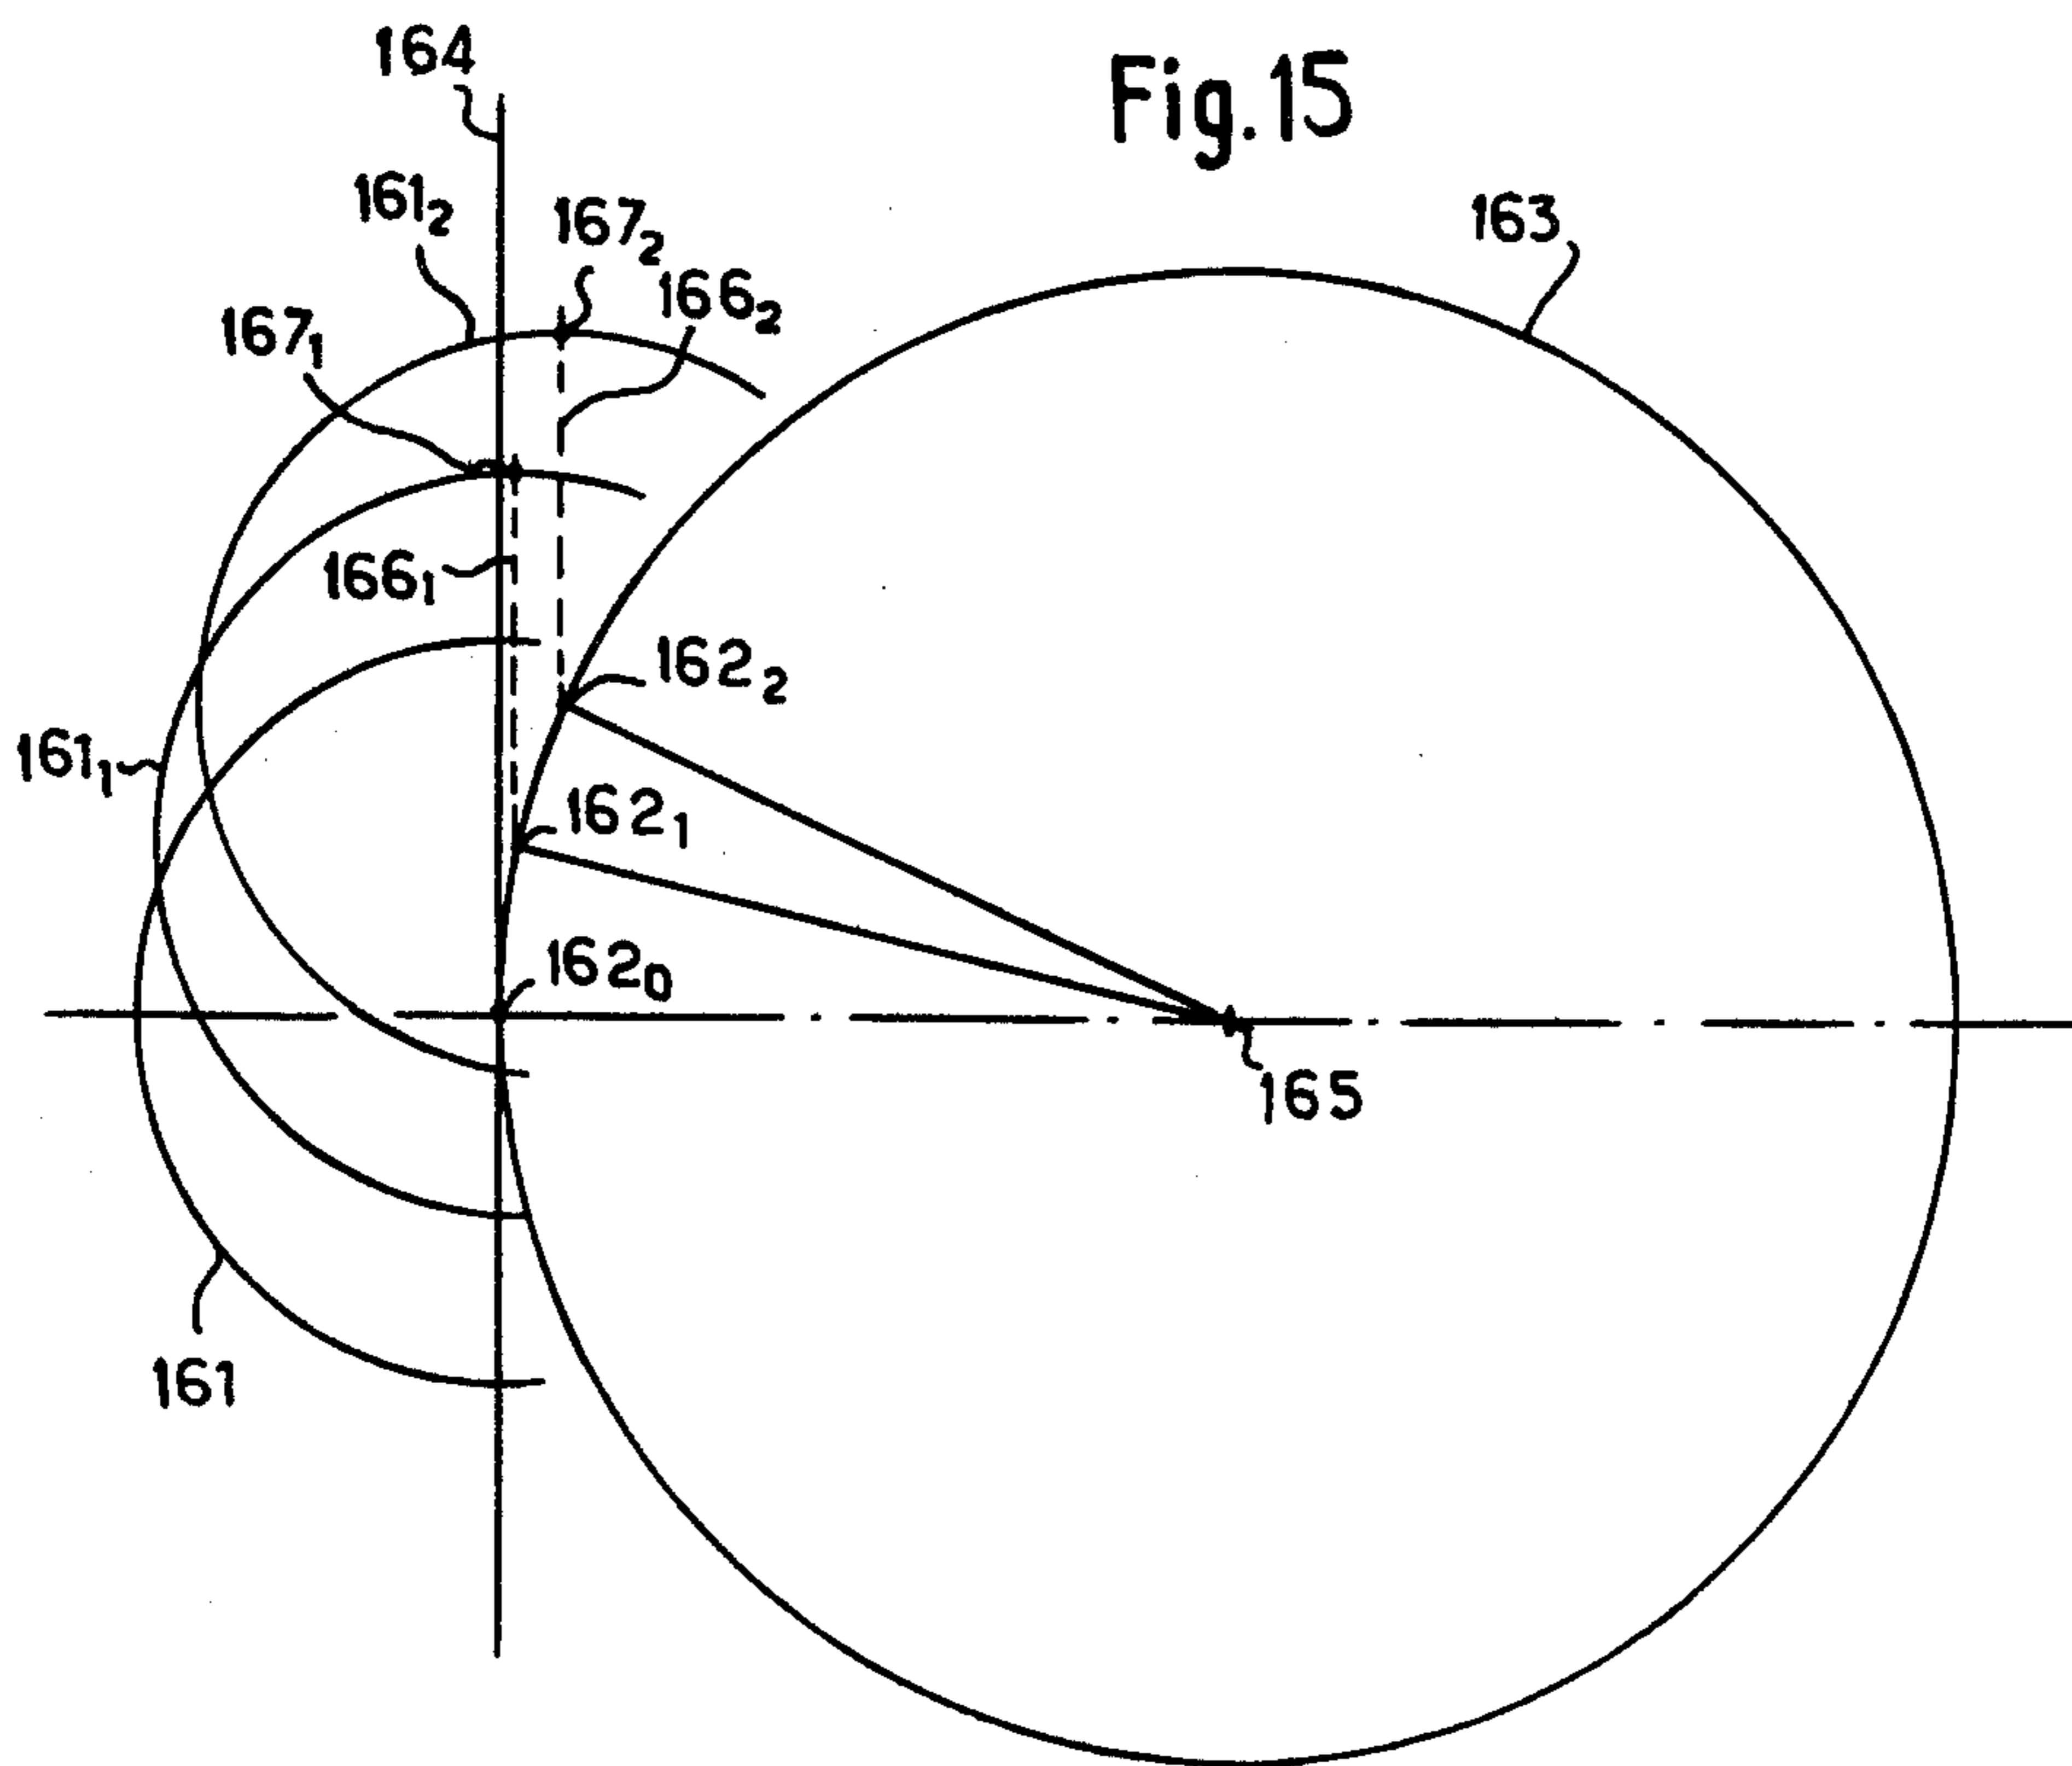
PLATE WITH PASSAGES FOR FLUID ROTATIVE MACHINES
